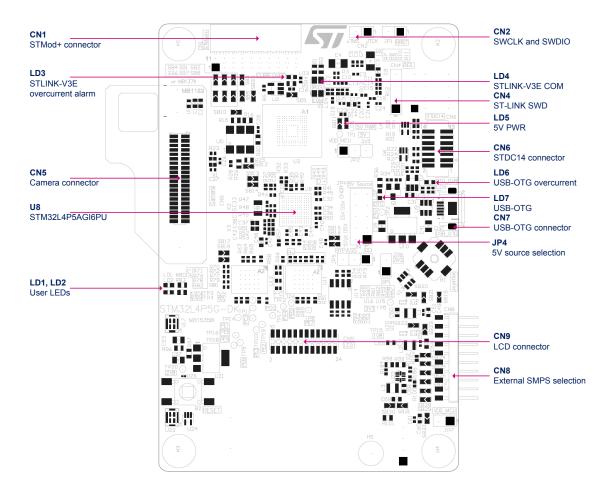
STM32L4P5G-DK PCB layout (Top view)
